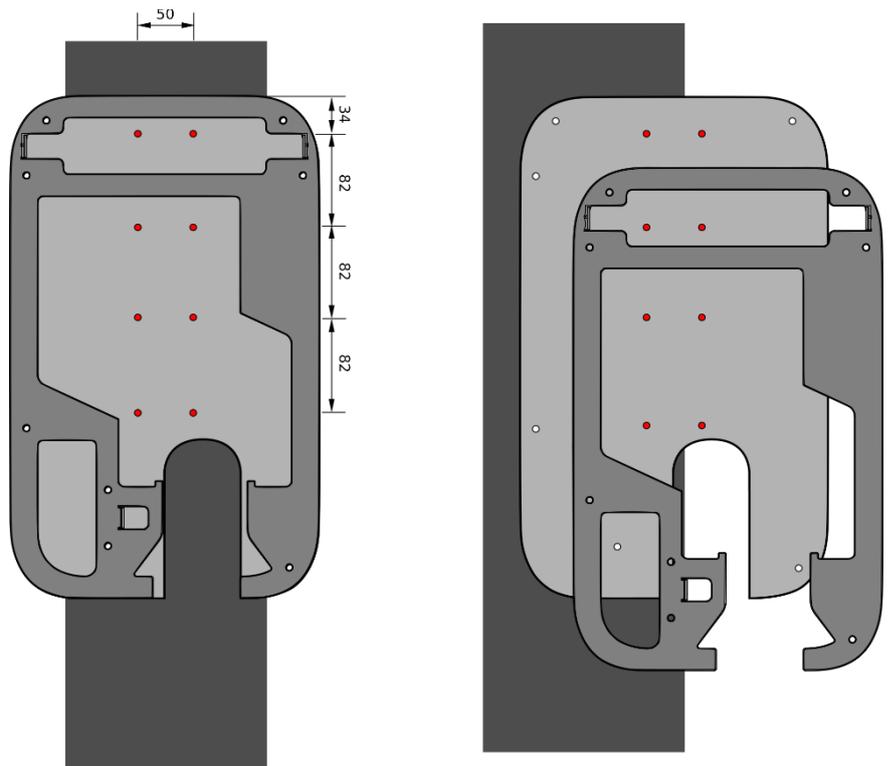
Possible locations of holes to screw the adapter plate to the surface
